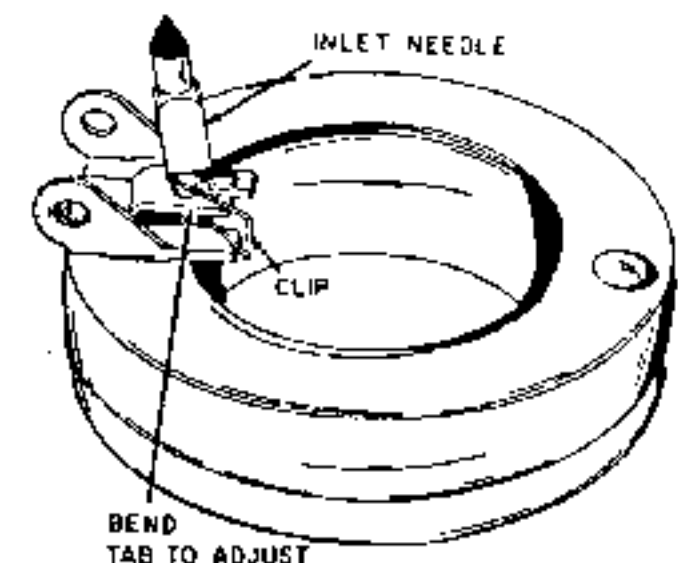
View of float and fuel inlet valve needle. The valve needle shown is equipped with resilient tip and a clip. Bend tab shown to adjust float height.
